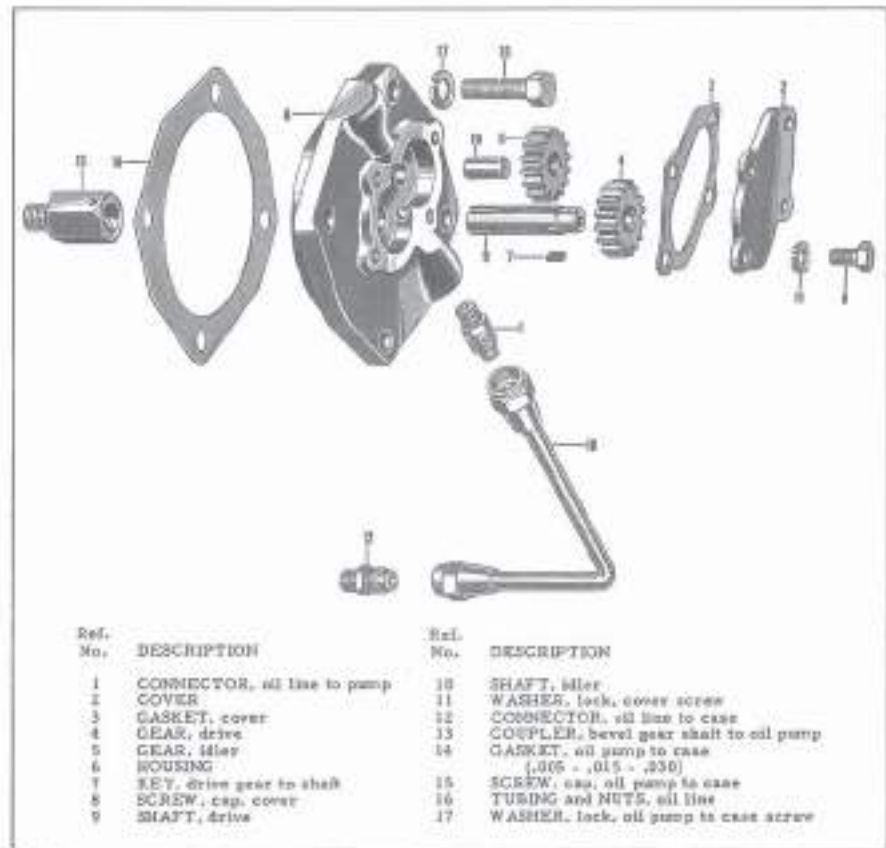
Transmission Oil Pump (Early Model) - Exploded View
